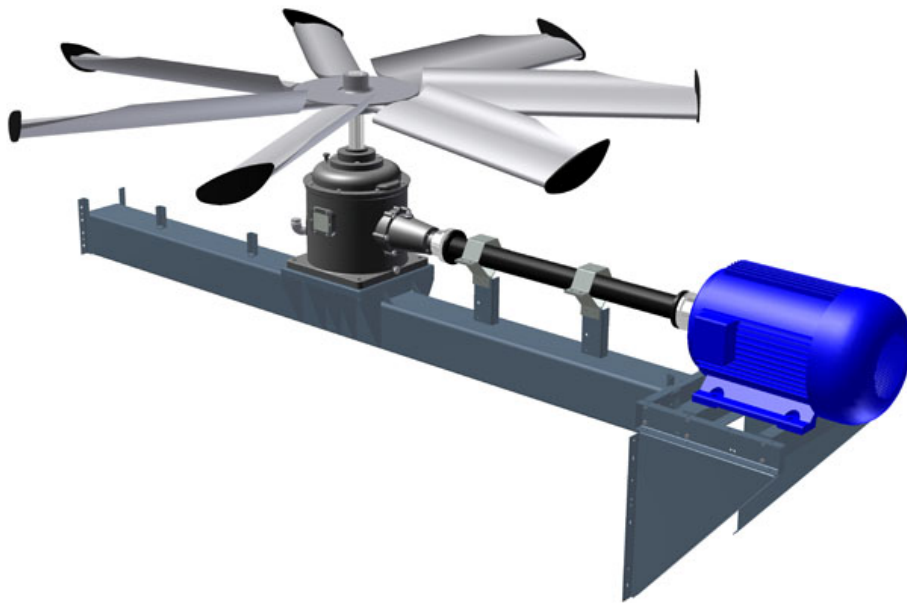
Driven equipment arrangement (gearbox and axial fan) coupled to an electric motor [32]
